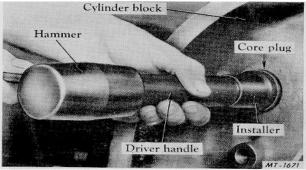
Installing Core Plug in End of Block Using SE-1945 Installer with SE- 1581-1B Driver Handle
